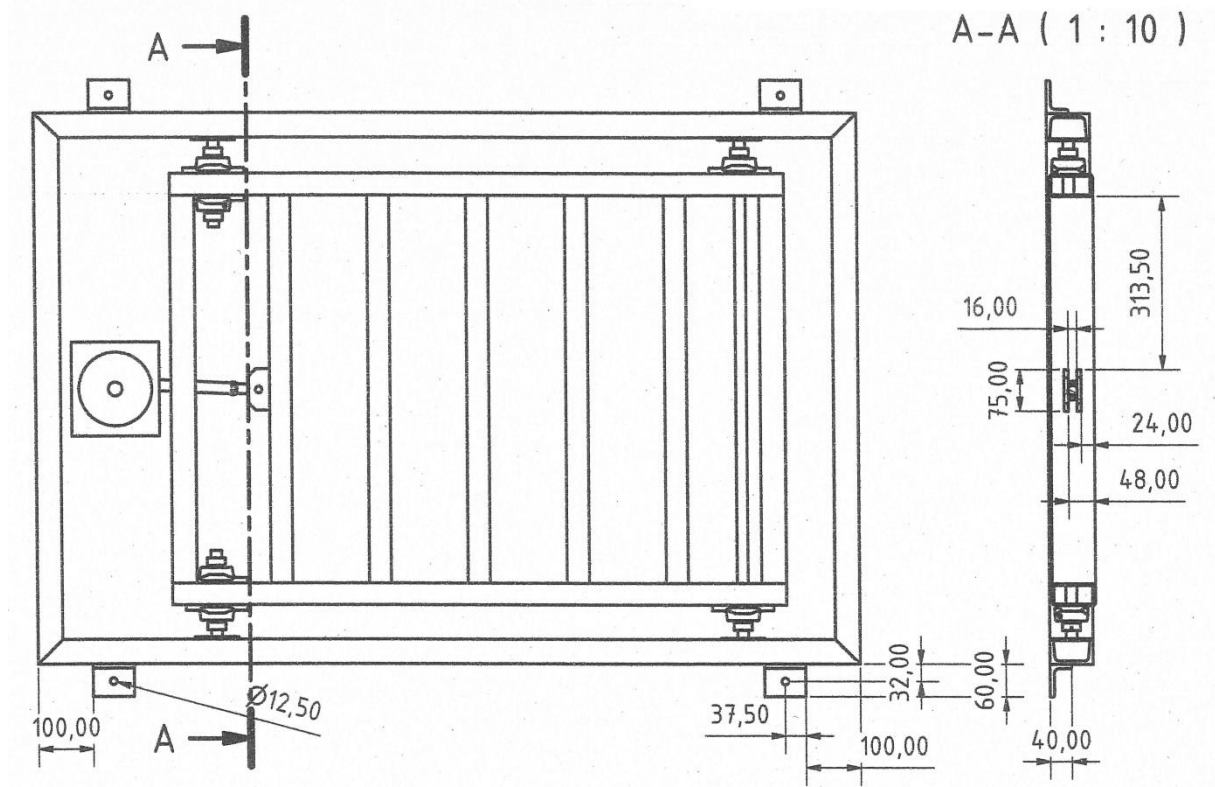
Design drawing of the implemented swinging ground (dimensions in mm).
